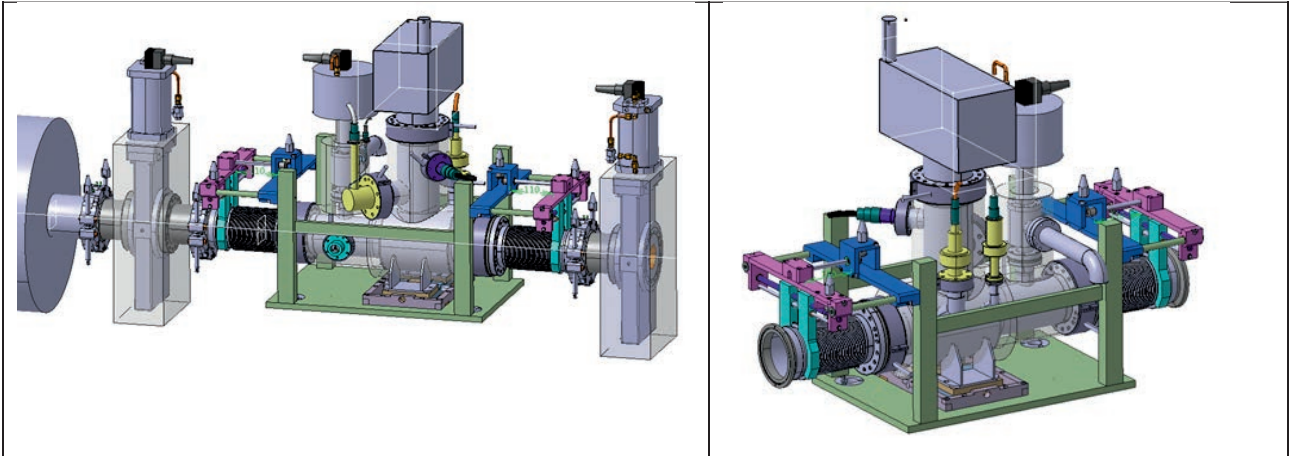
Right- Vacuum module assembly installed on the IP side of the TAXS with all-metal gate valves. The valves are closed in case of remote exchange of the vacuum pump module (left). Note that the cantilever support structure is not shown in the picture.
